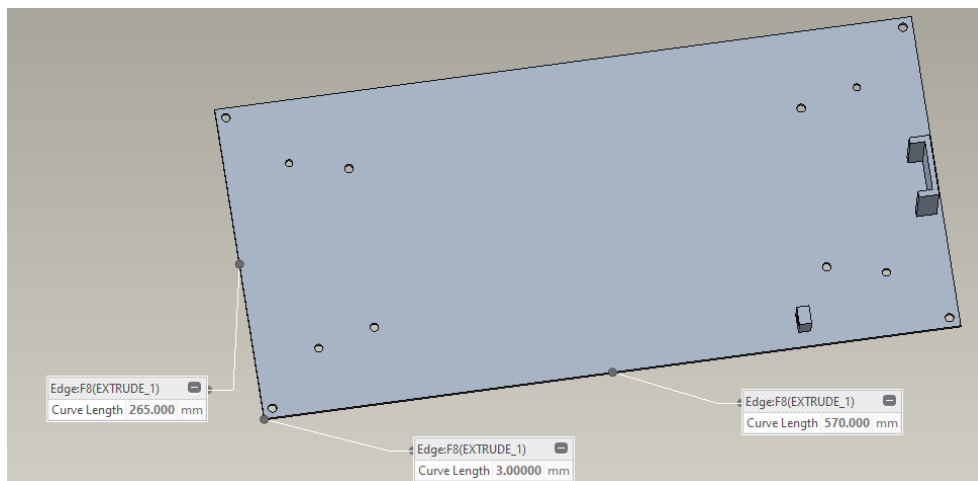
Designed Base Plate for Mounting Cell-Stack on the Heat Sink.
